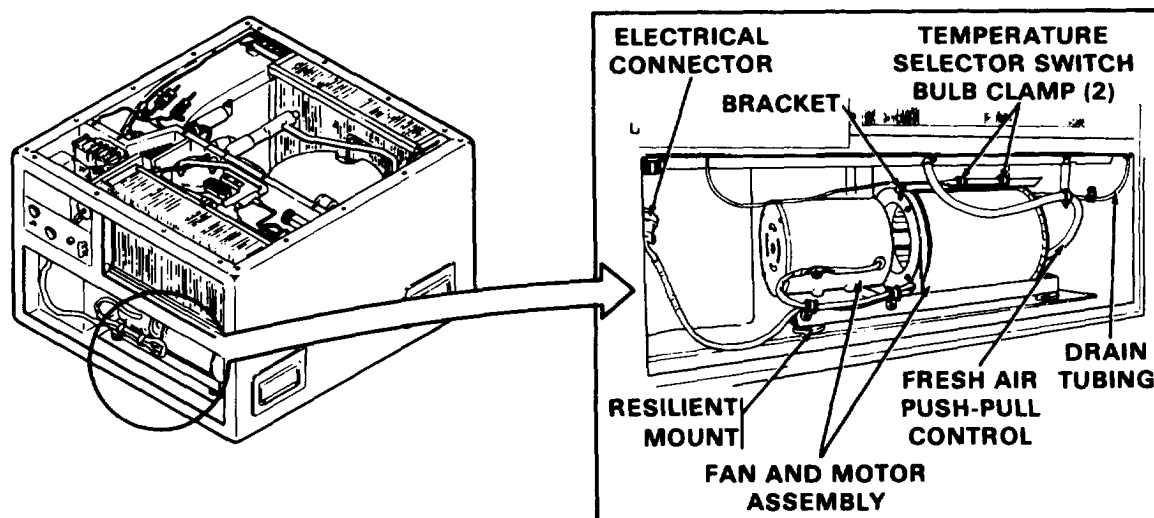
Evaporator fan and motor assembly, removal and installation
